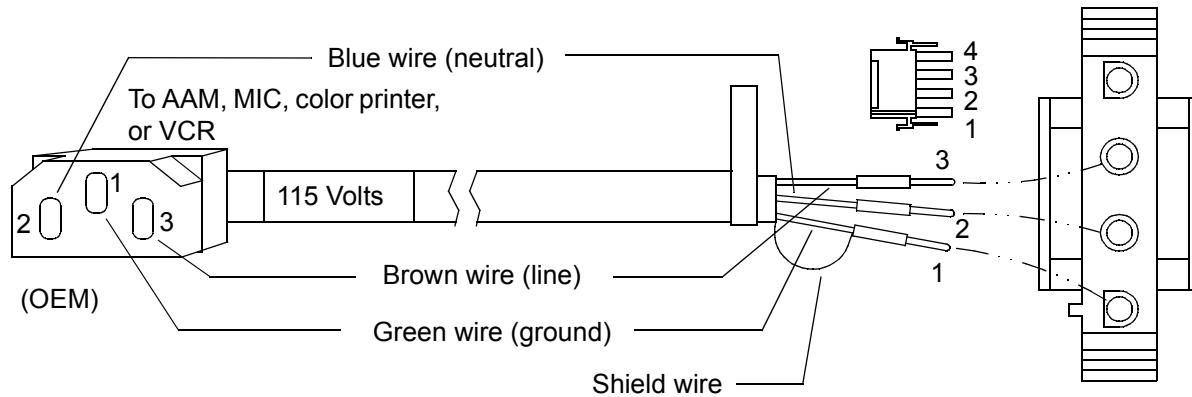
Monitor Power Cable Assembly (P/N 3500-2616-XX)
